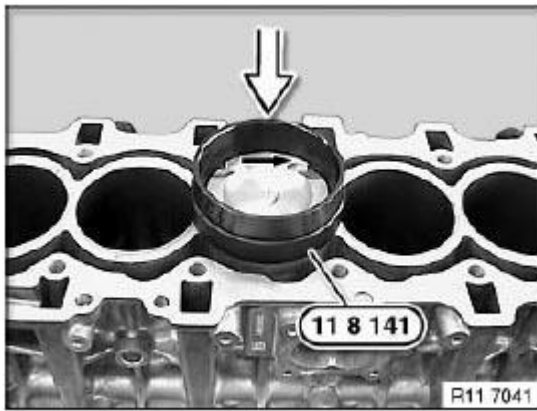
Pressing Piston Using Special Tool (11 8 141)
